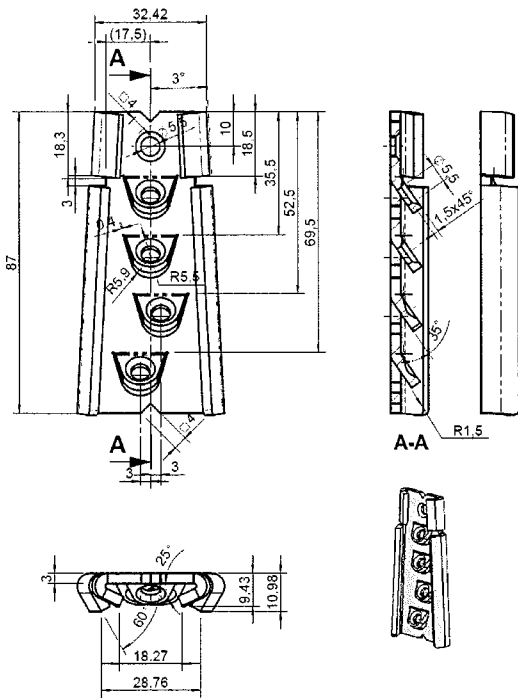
Header plate of the Joist plate of the beam connector 90 x 70
